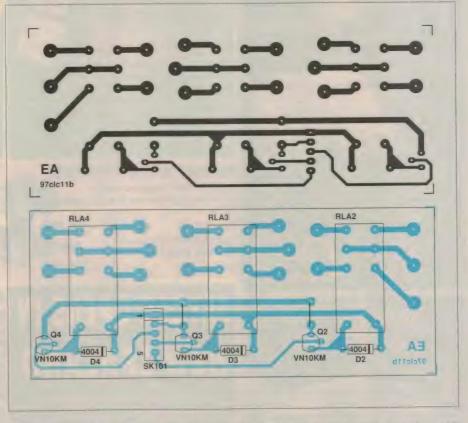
The etching pattern for the optional Extension boards (top), together with the matching wiring and parts overlay diagram. As you can see, very few extra parts are needed.
